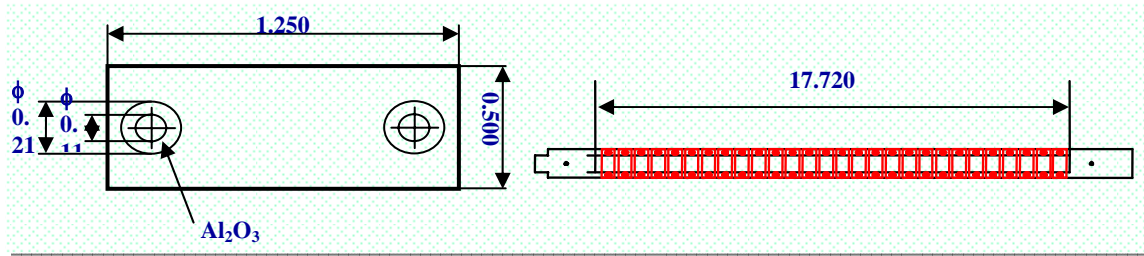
Sample geometry and design and the Inconel 625 corrosion sample holder, which can accommodate up to twenty eight samples.
